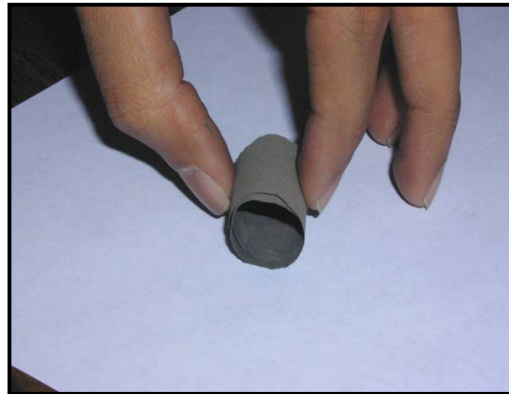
Iron aluminide based intermetallic sheet (150 μm thick) fabricated by VPS technique. Thin sheet could be easily rolled without cracking.
